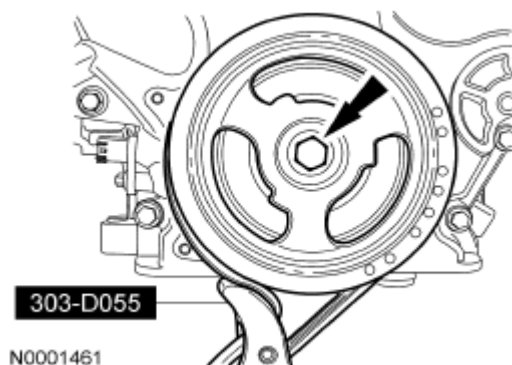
Identifying Special Tool & Crankshaft Damper Bolt
